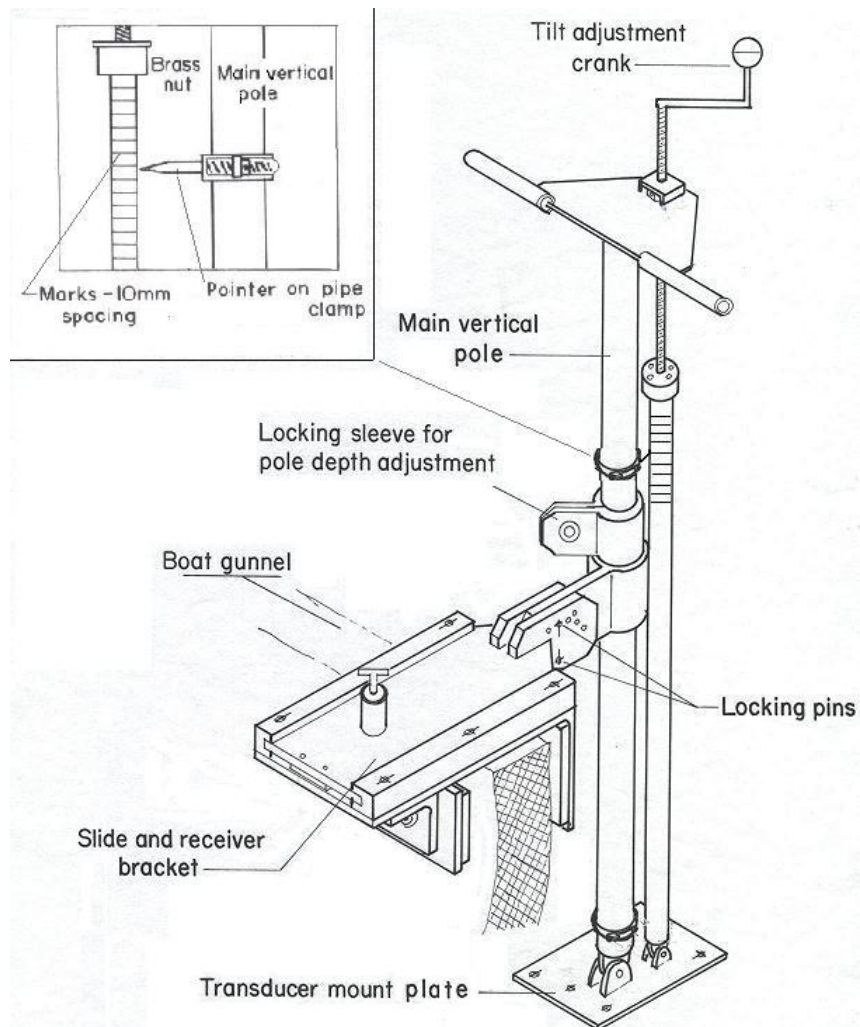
Three-dimensional view of the adjustable pole mount attached to a boat. The slide and receiver bracket can be mounted to any solid attachment
